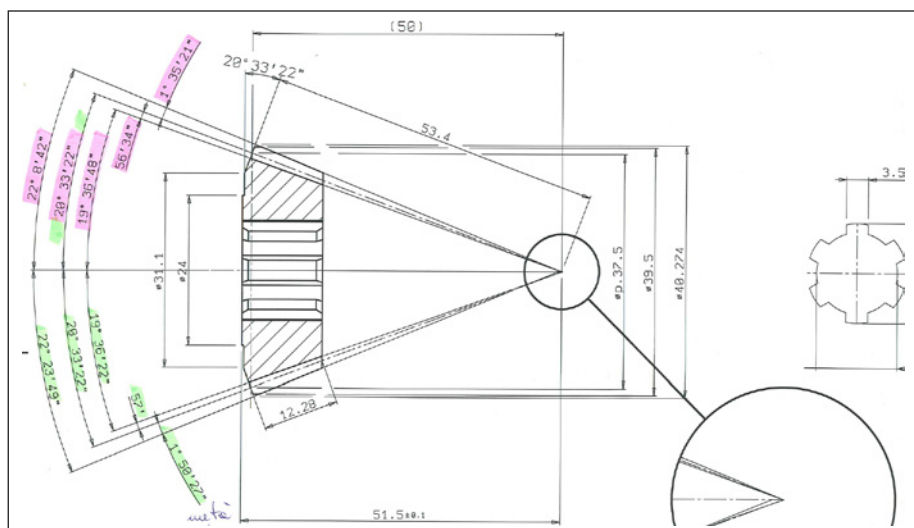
Drawing of a bevel gear: on the top side, there is the initial dimensioning (all apexes are in the same point). On the bottom, there are dimensions from the workshop.
